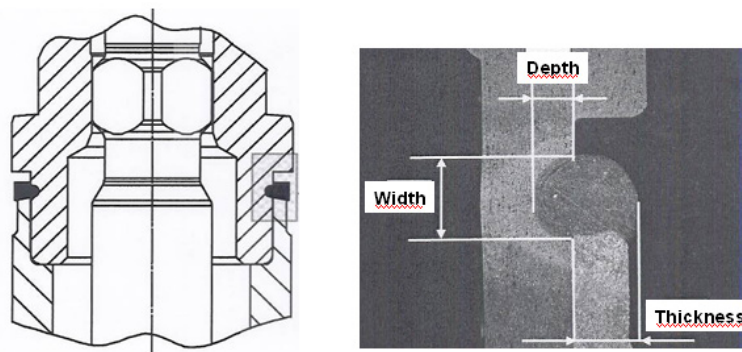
Cross-section of welding area and welding pool (RBTR, datasheet of HDEV4.1)
